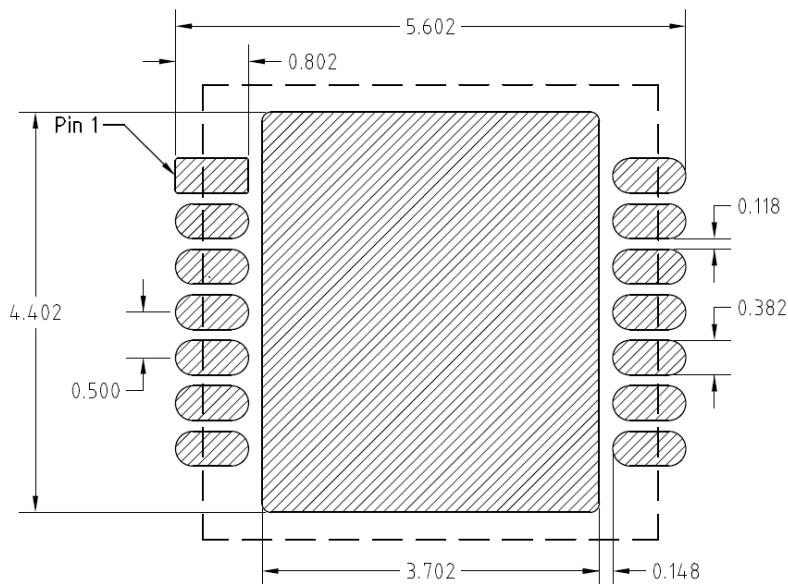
Example of solder mask for the 5 x 5 x 1.2 mm DFN package (Top view)
